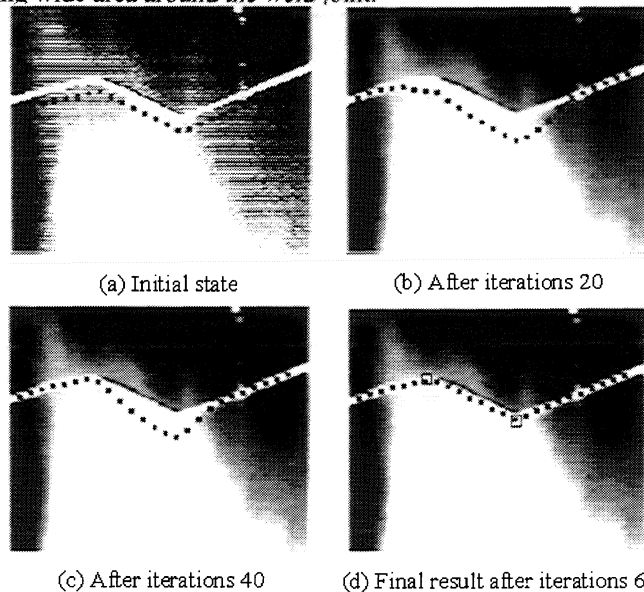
Joint feature tracking result in case the torch is approaching to weld joint surface as the welding proceeds: lap joint
